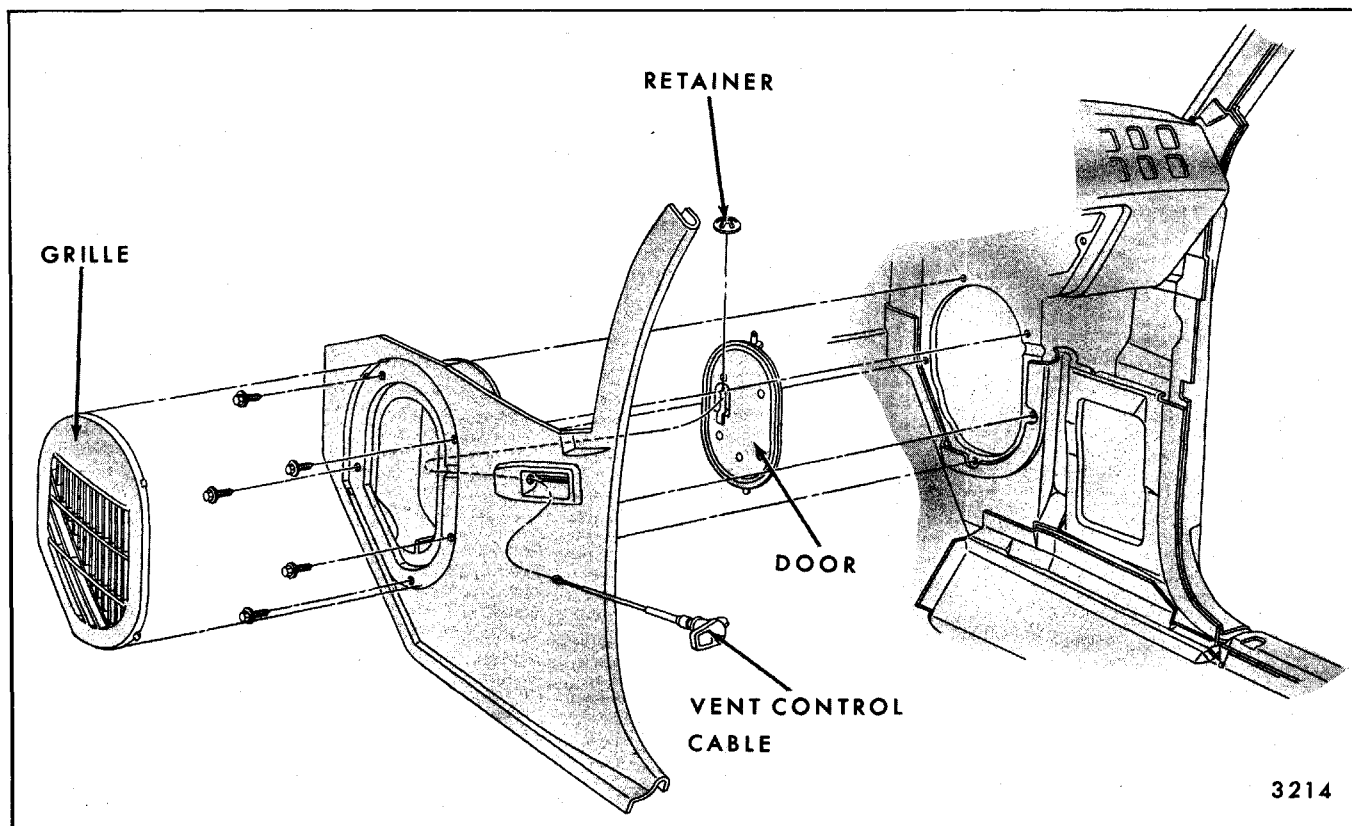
Shroud Side Finishing Panel - "X" Styles
